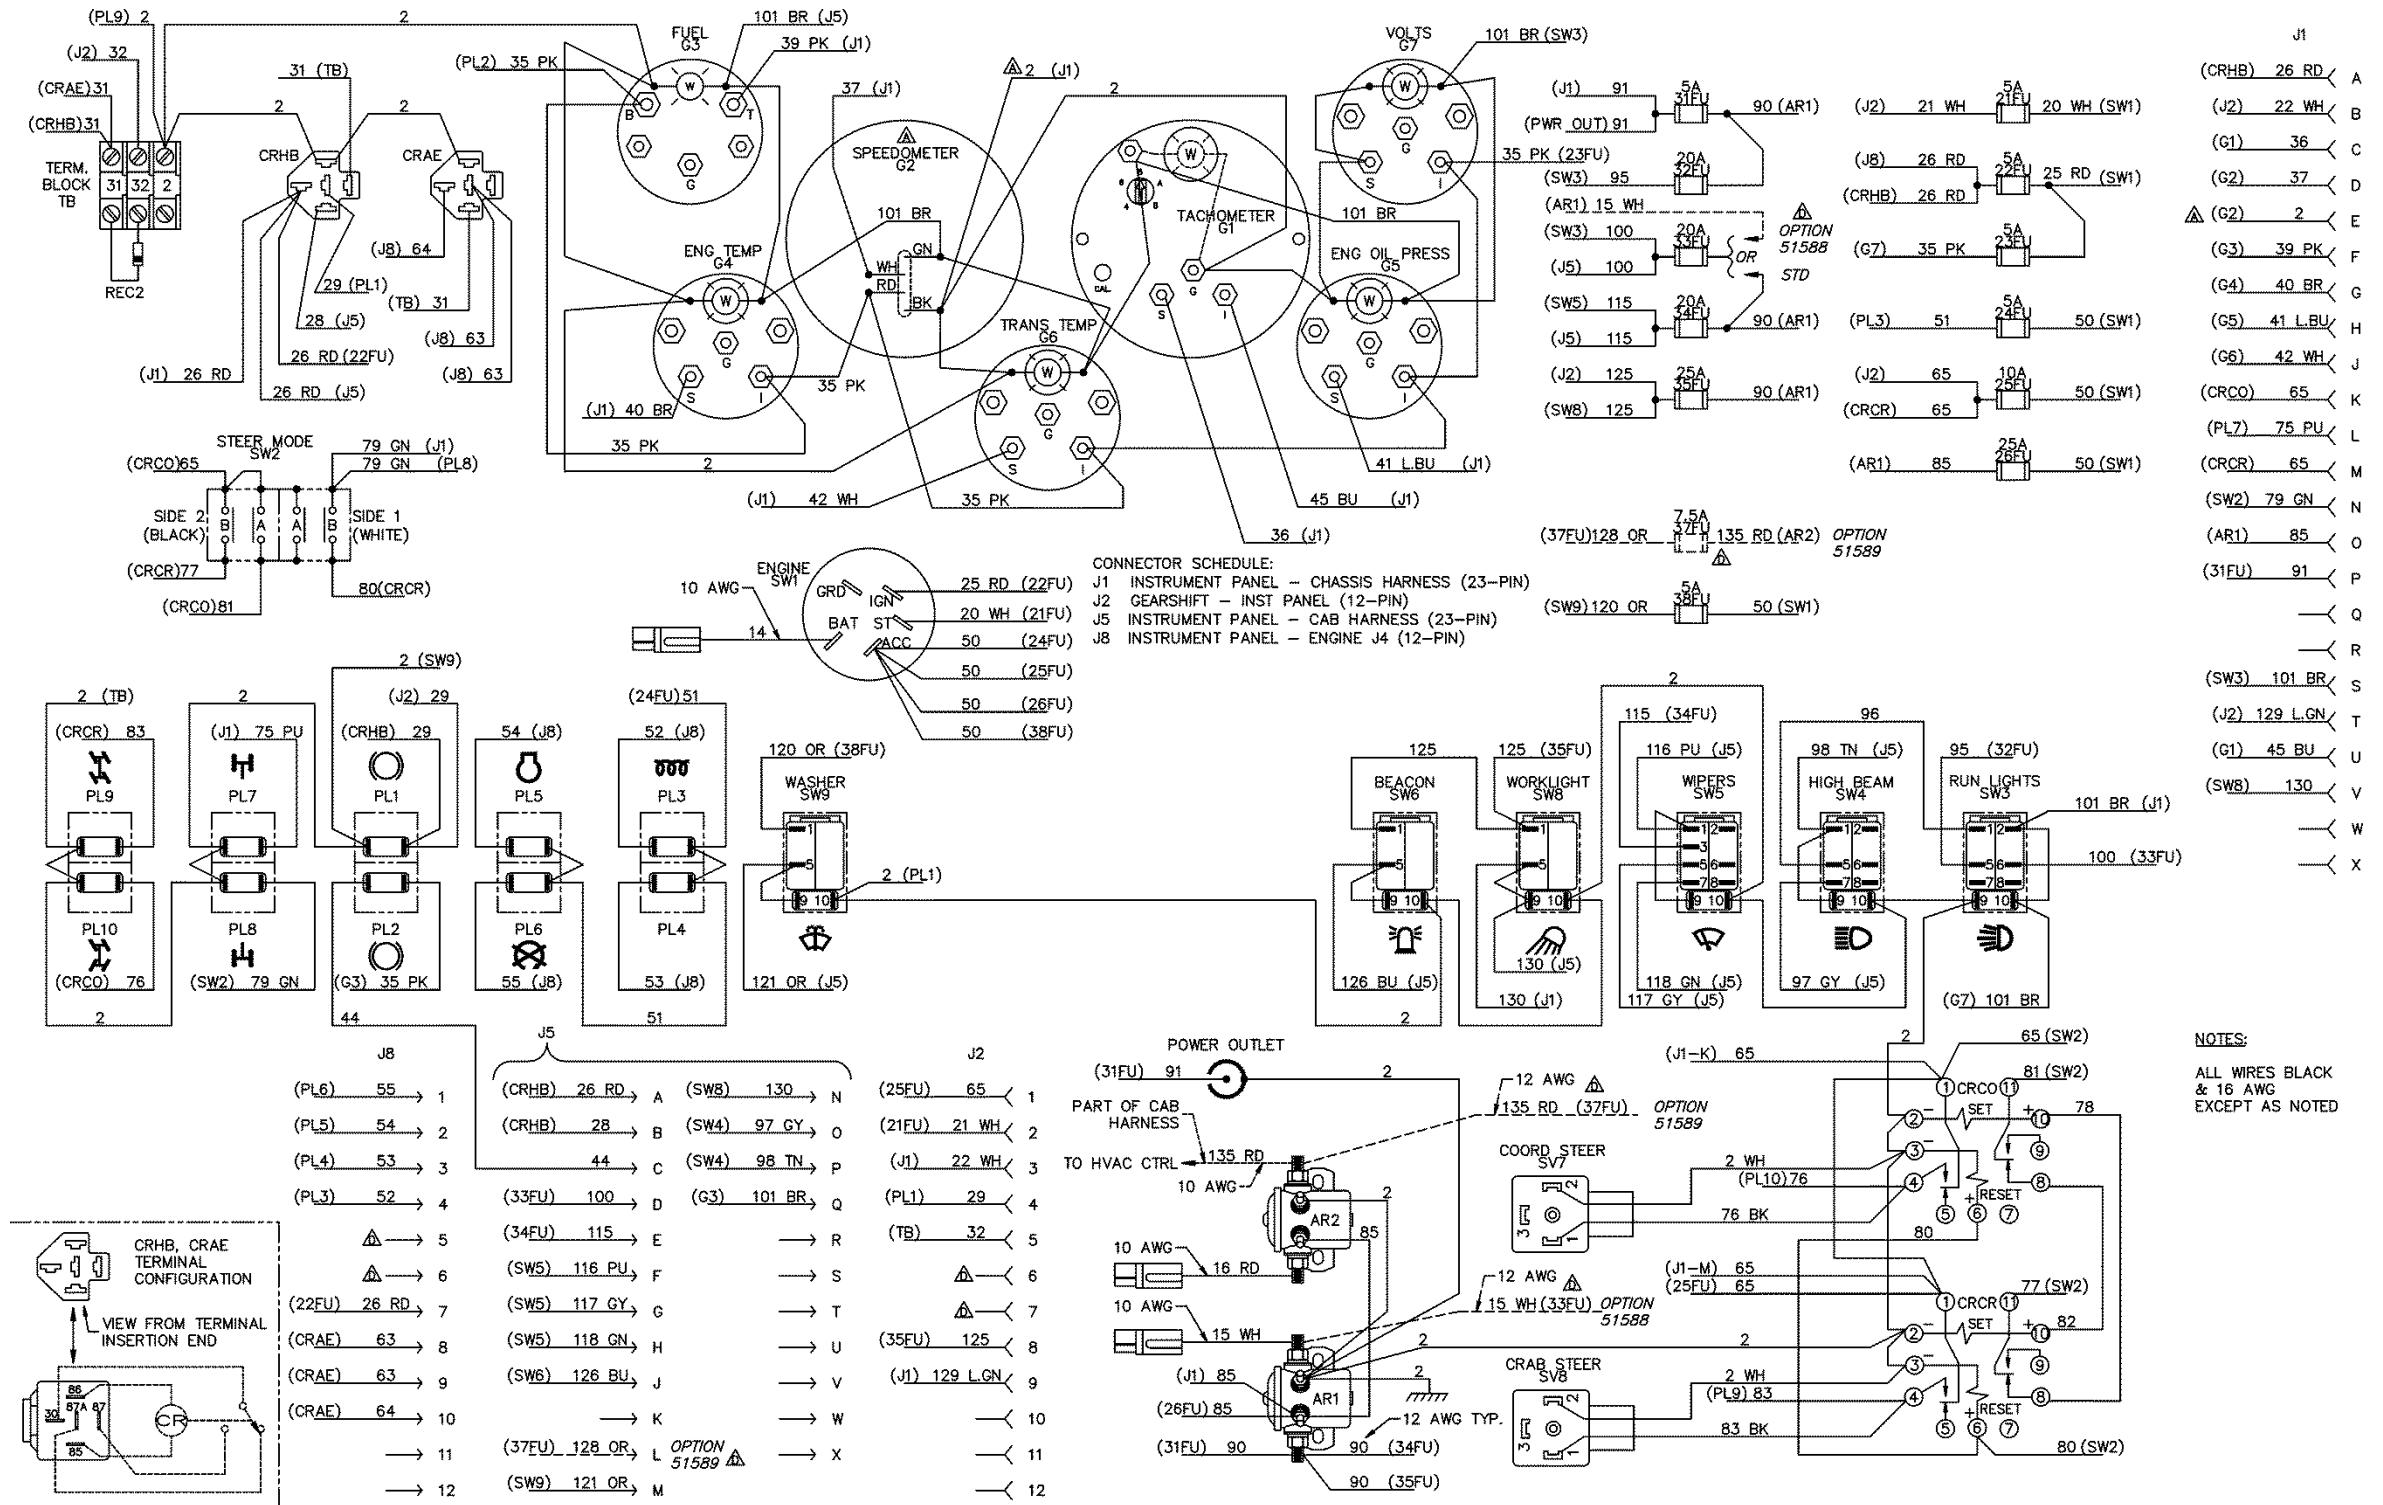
Harness, Instrument Panel SN 13928-13+, 12-C-3906, & 12-C-1950
